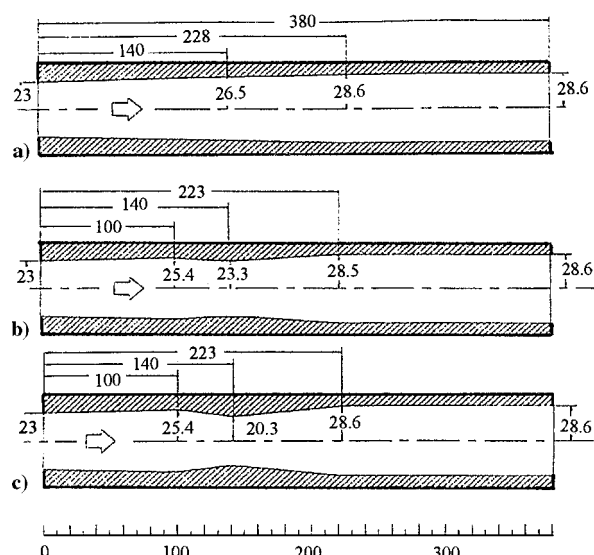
Names and profiles of the test tubes used: a) h0 tube, b) h3 tube, and c) h6 tube (all dimensions are in millimeters).
